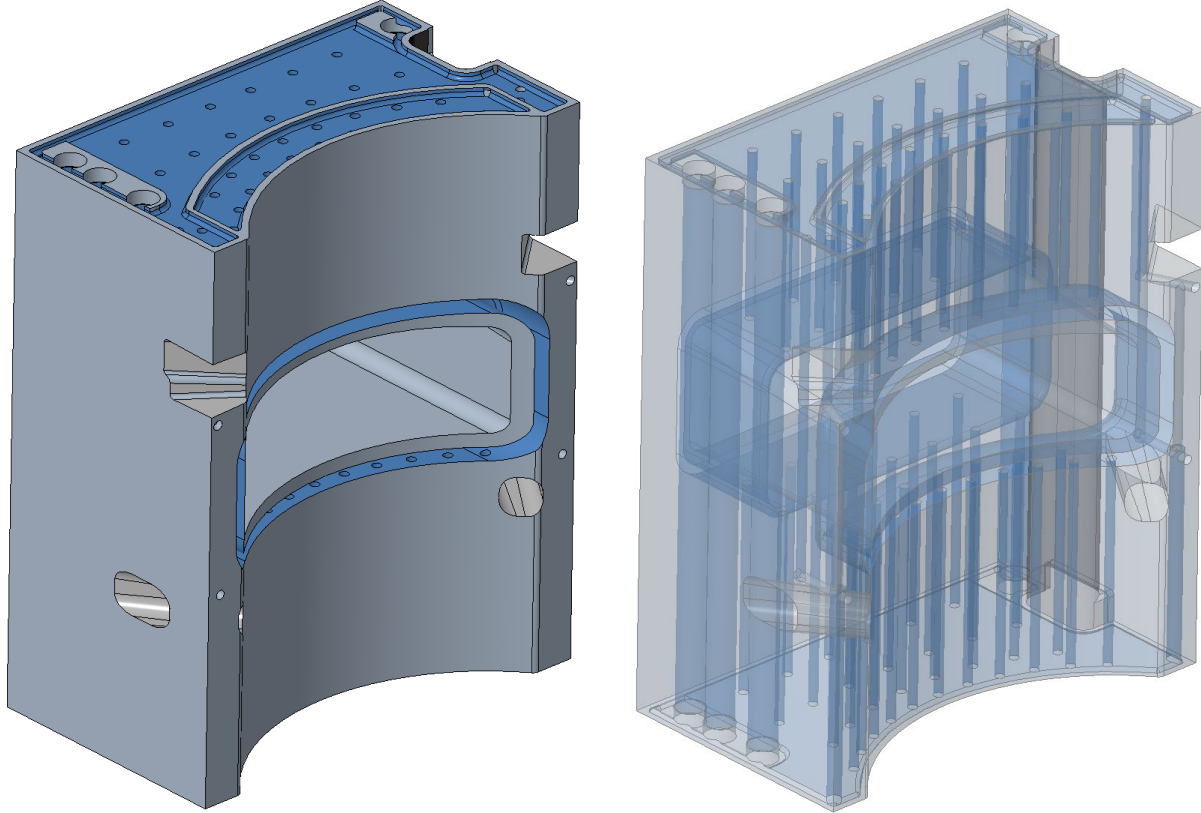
Middle backbone machined from stainless steel plate. Cooling holes are shown in blue.
